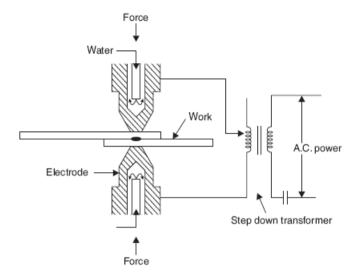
Schematic of Circuit for Resistance Spot Welding Process
